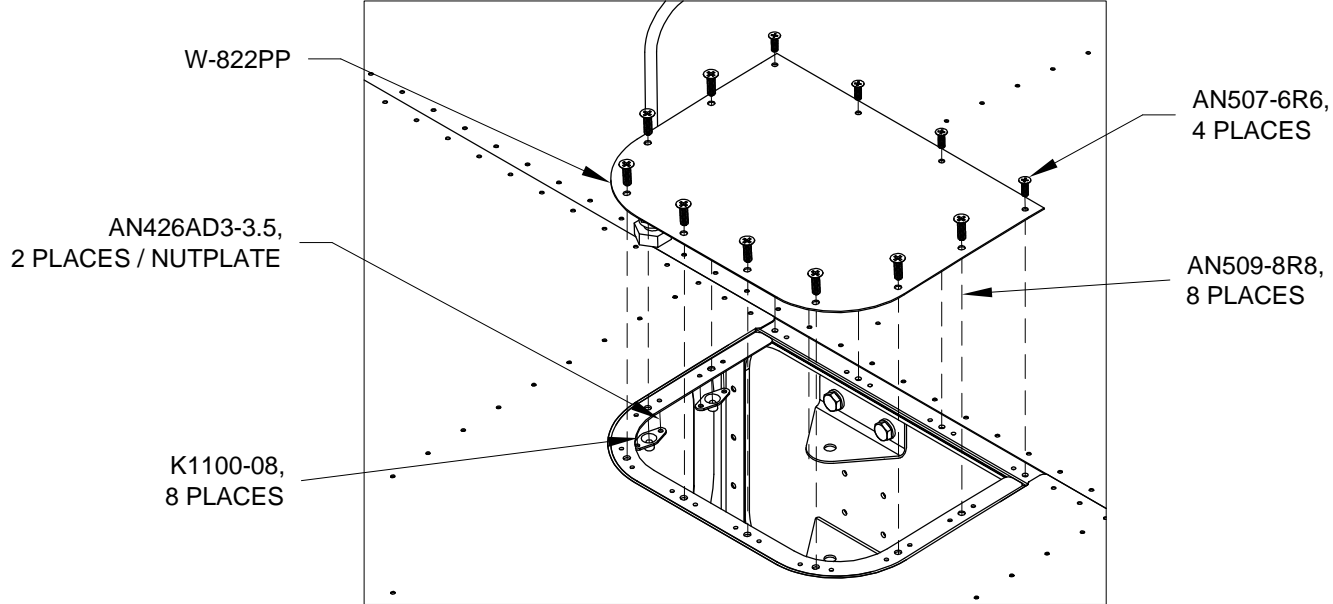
TYPICAL WING ACCESS PLATE ATTACH
